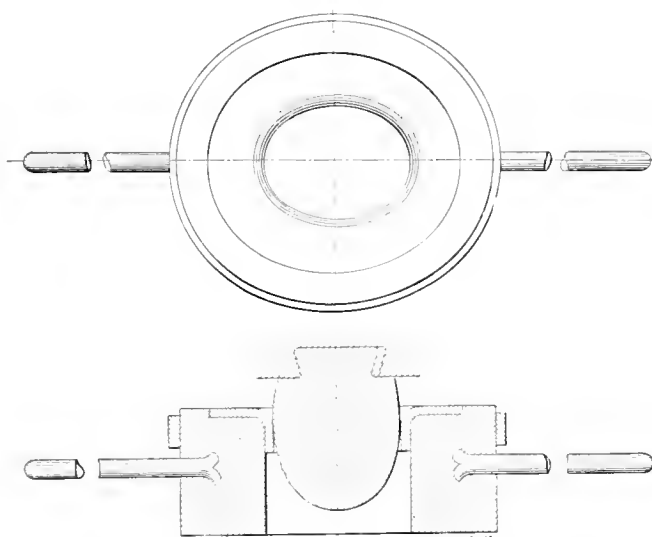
Die used for Forging and Bending Man-hole Seatings.
